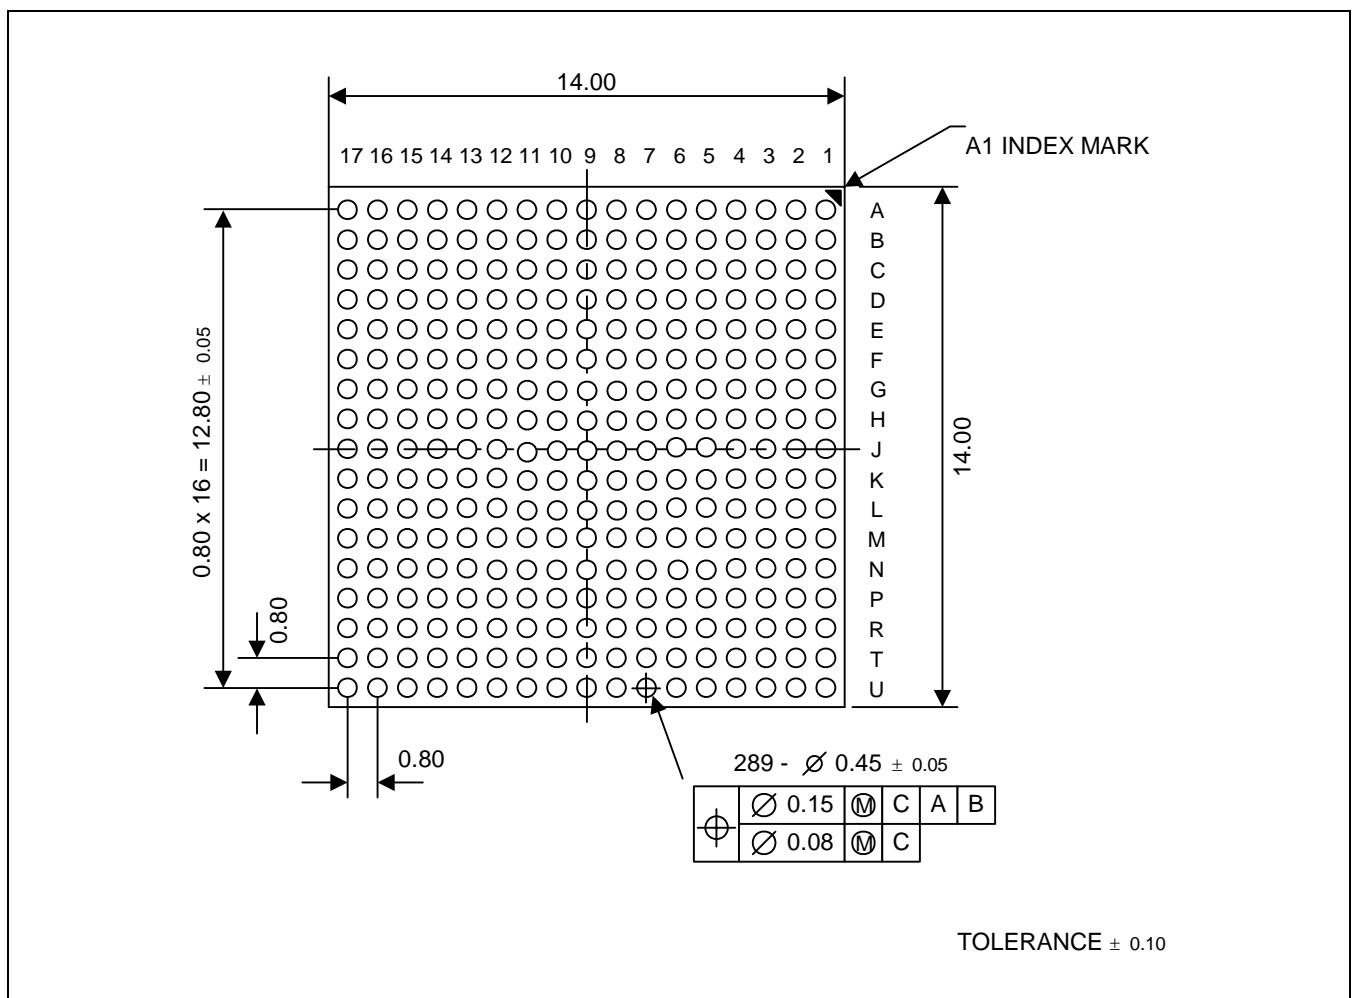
289-FBGA-1414 Package Dimensions 2 (Bottom View)
